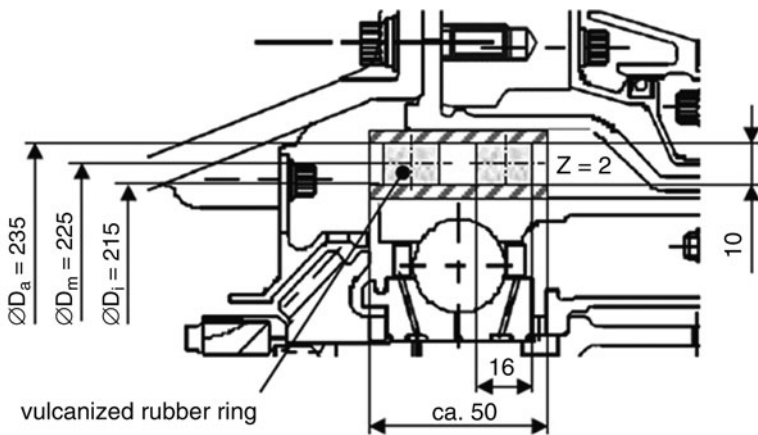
A possible integration of rubber rings in an aero engine HP front bearing design [8]
